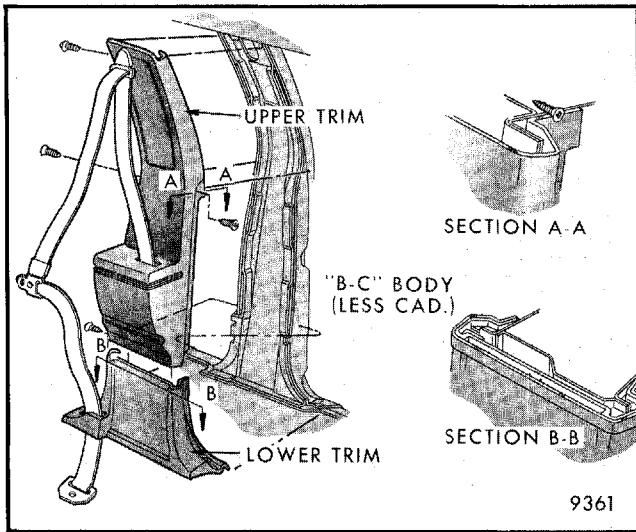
Center Pillar Trim Attachment - "B,C" Styles (Less Cadillac)
